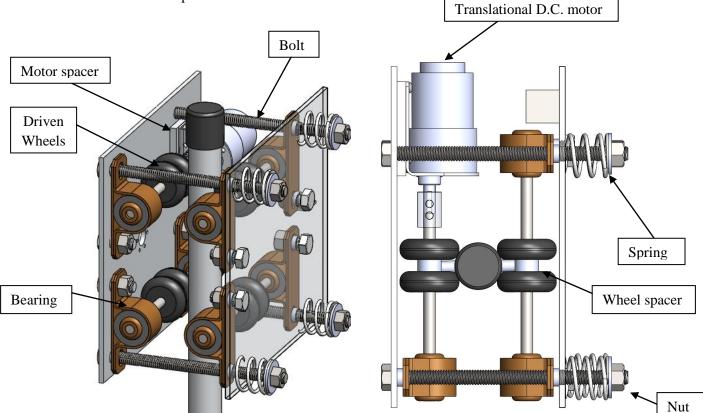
CAD model of translational module assembly isometric view (left) and top view (right)
